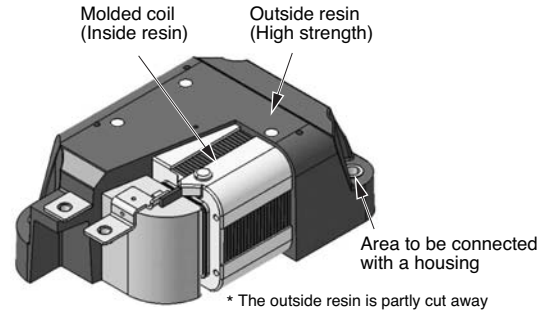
Structure of Resin-Molded Reactor (The coil is molded with the inside resin, with the entire parts enclosed in the outside resin)
